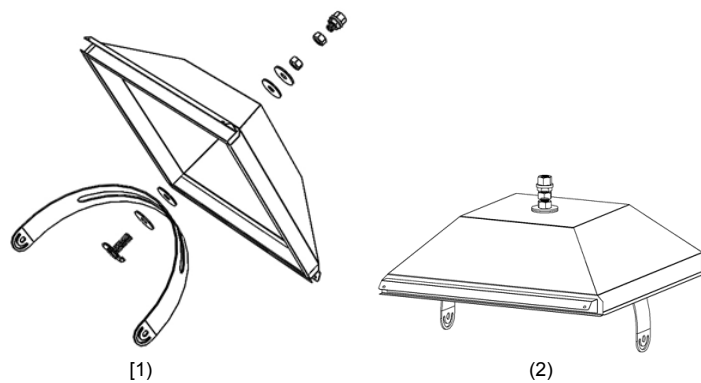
Recessed Assembly (1) and Recessed Assembly Fastened Together (2)
